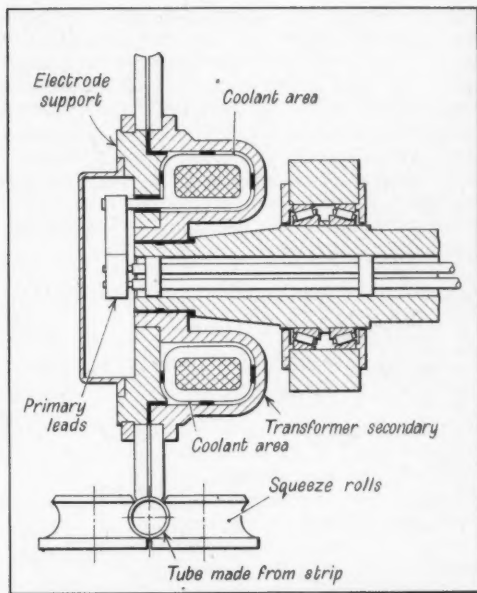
Sectional drawing showing the construction of the Yoder type V welding unit
